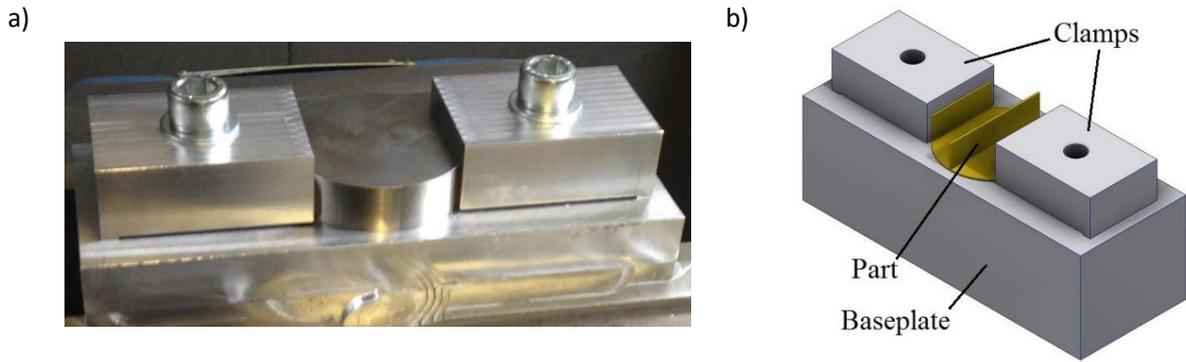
(a) Actual disc in new clamp; (b) CAD model of new clamp design with finished part in place
